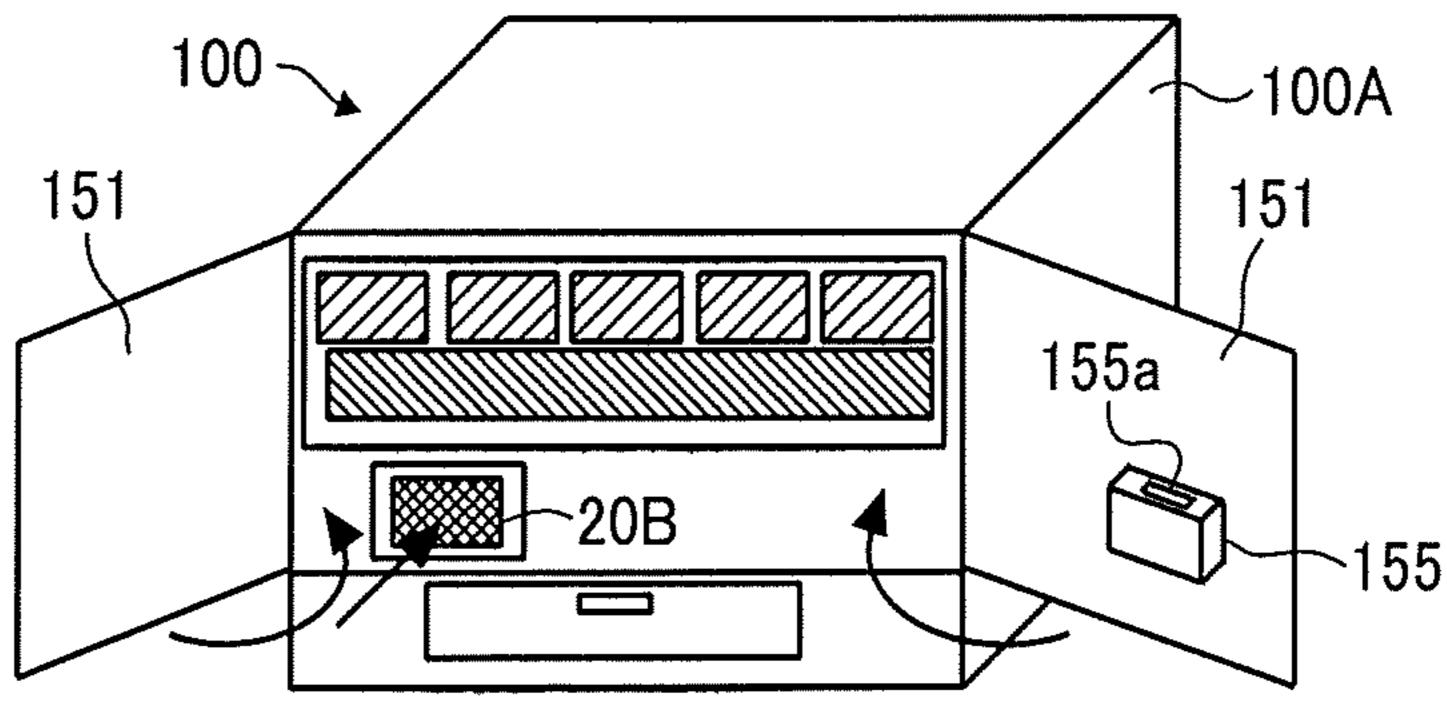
IMAGE FORMING APPARATUS INCLUDING A REMOVABLE COMPONENT WHICH IS HELD BY HOLDER
